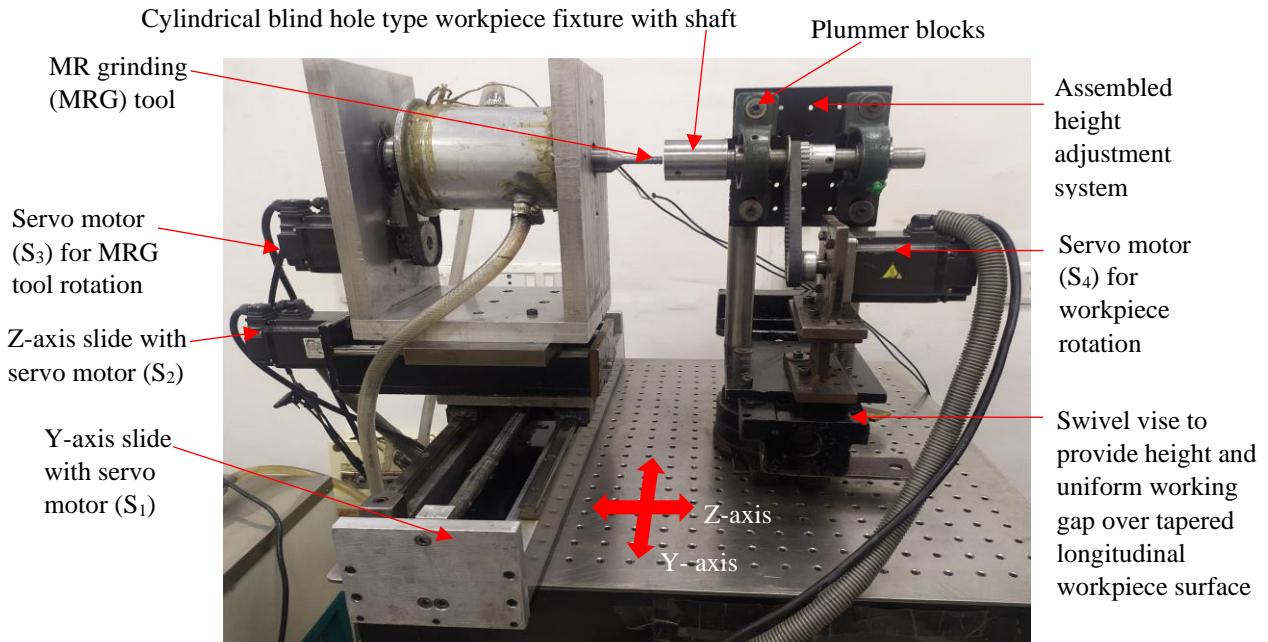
Complete assembly of the experimental setup for the magnetorheological grinding tool used in finishing the cylindrical blind hole type workpiece surfaces.
